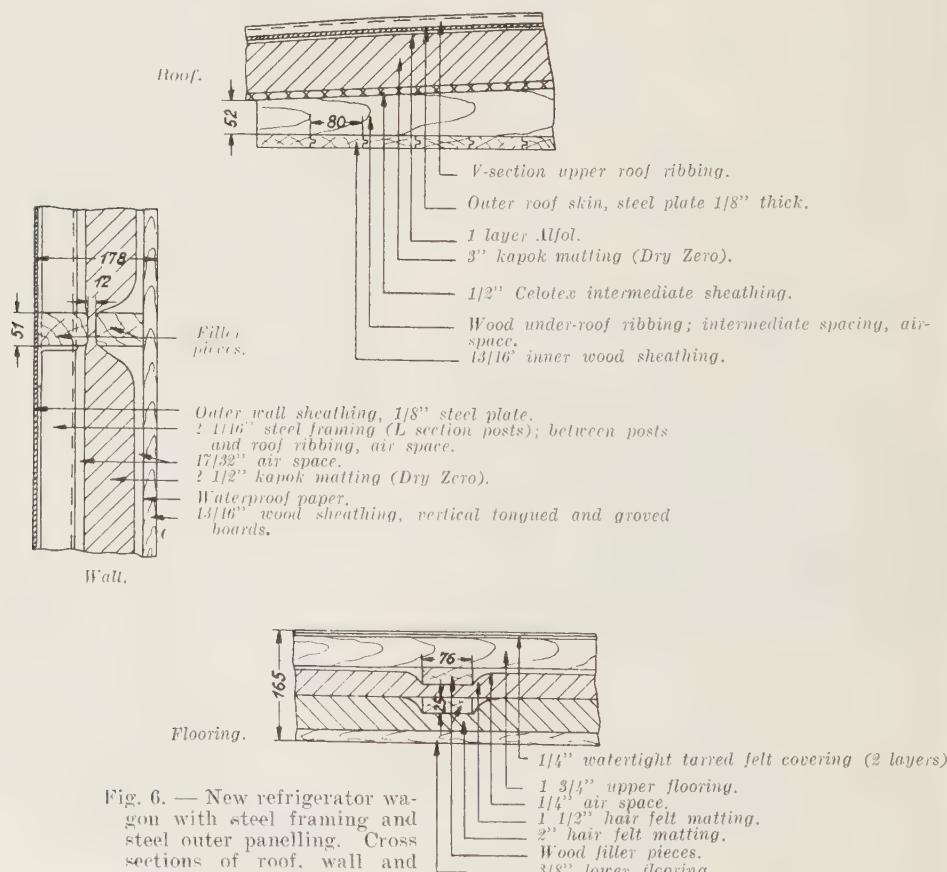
New refrigerator wagon with steel framing and steel outer panelling. Cross sections of roof, wall and flooring.
